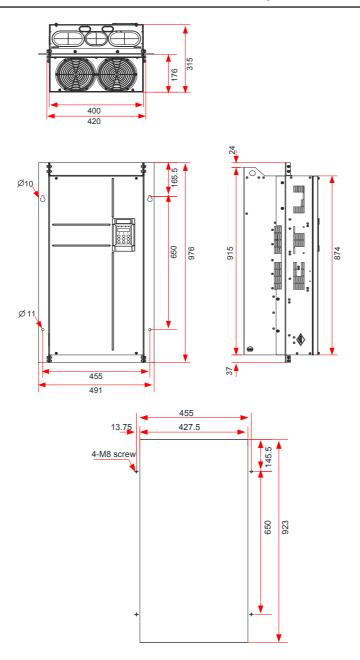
Dimensions of through hole mounting bracket and hole of MD500ET132G to MD500ET160G
